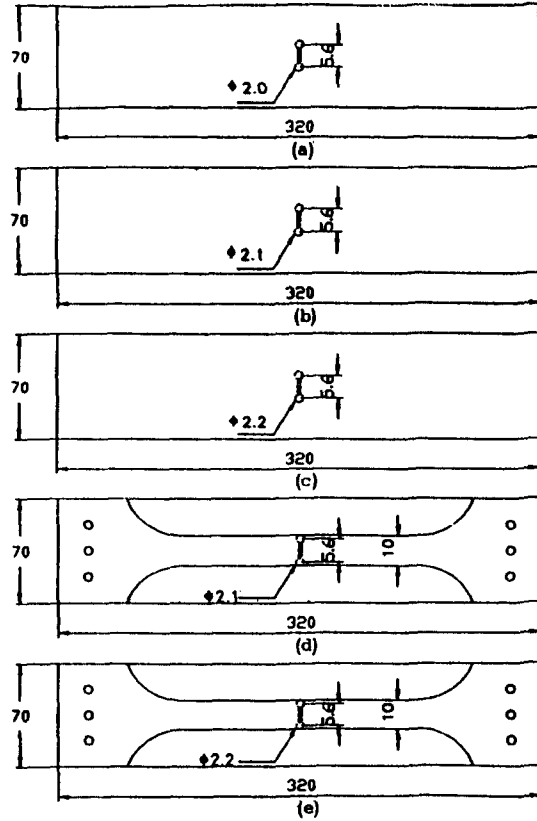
Fatigue test specimen of stop hole plate with and without patch(width : 10mm)
